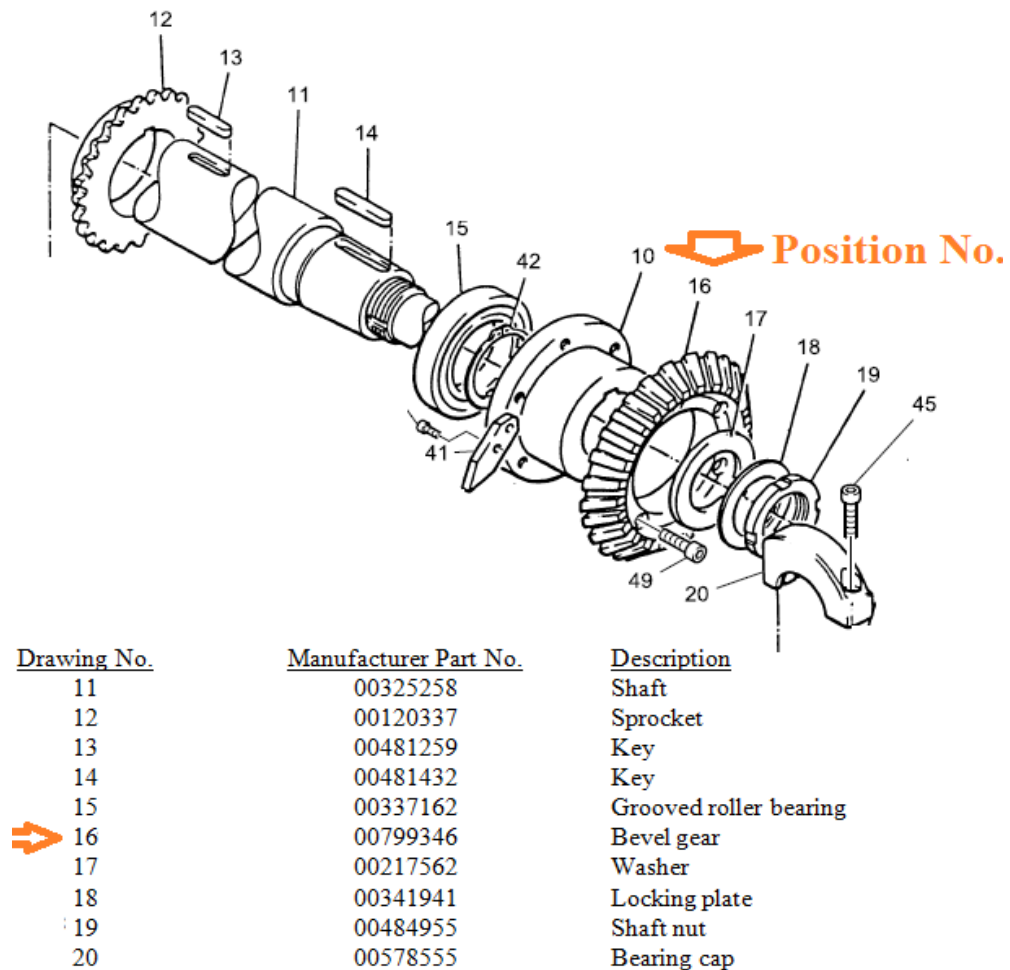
Parts drawings and numbers for HLP machine (Focke & Co Company, 2003)
